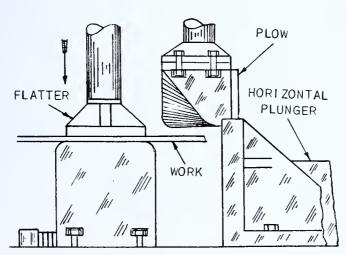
Flatter Holding the Plate to the Bolster While the Plow Descends
